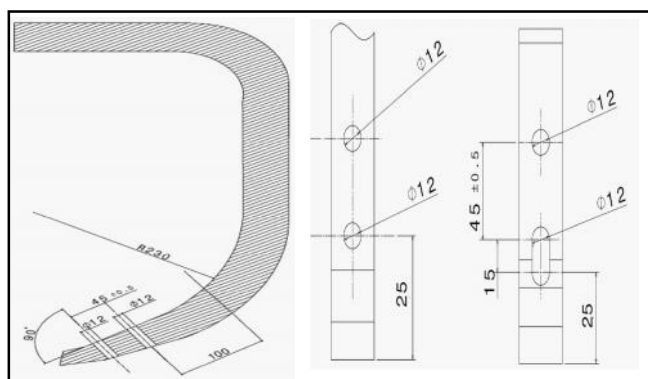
Fig. A : BIS standard-7565 rigid tractor drawn cultivator tine (All dimensions in mm)
